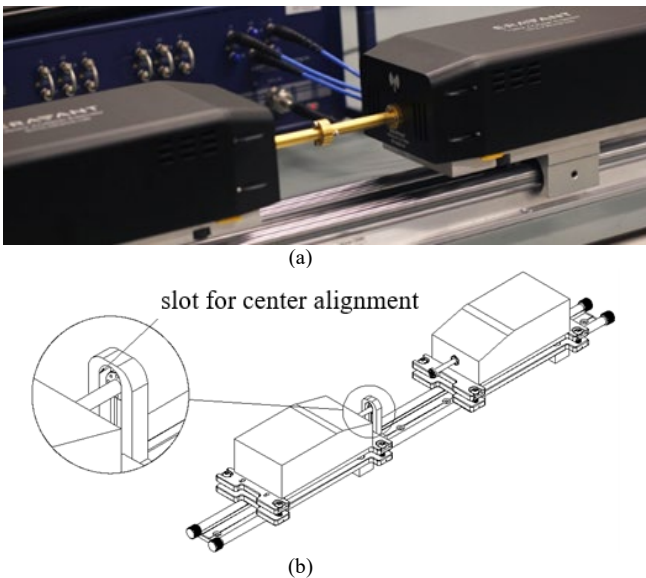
(a) Rail position system for streamlined component testing. (b) fixture used for contactless flange alignment.
